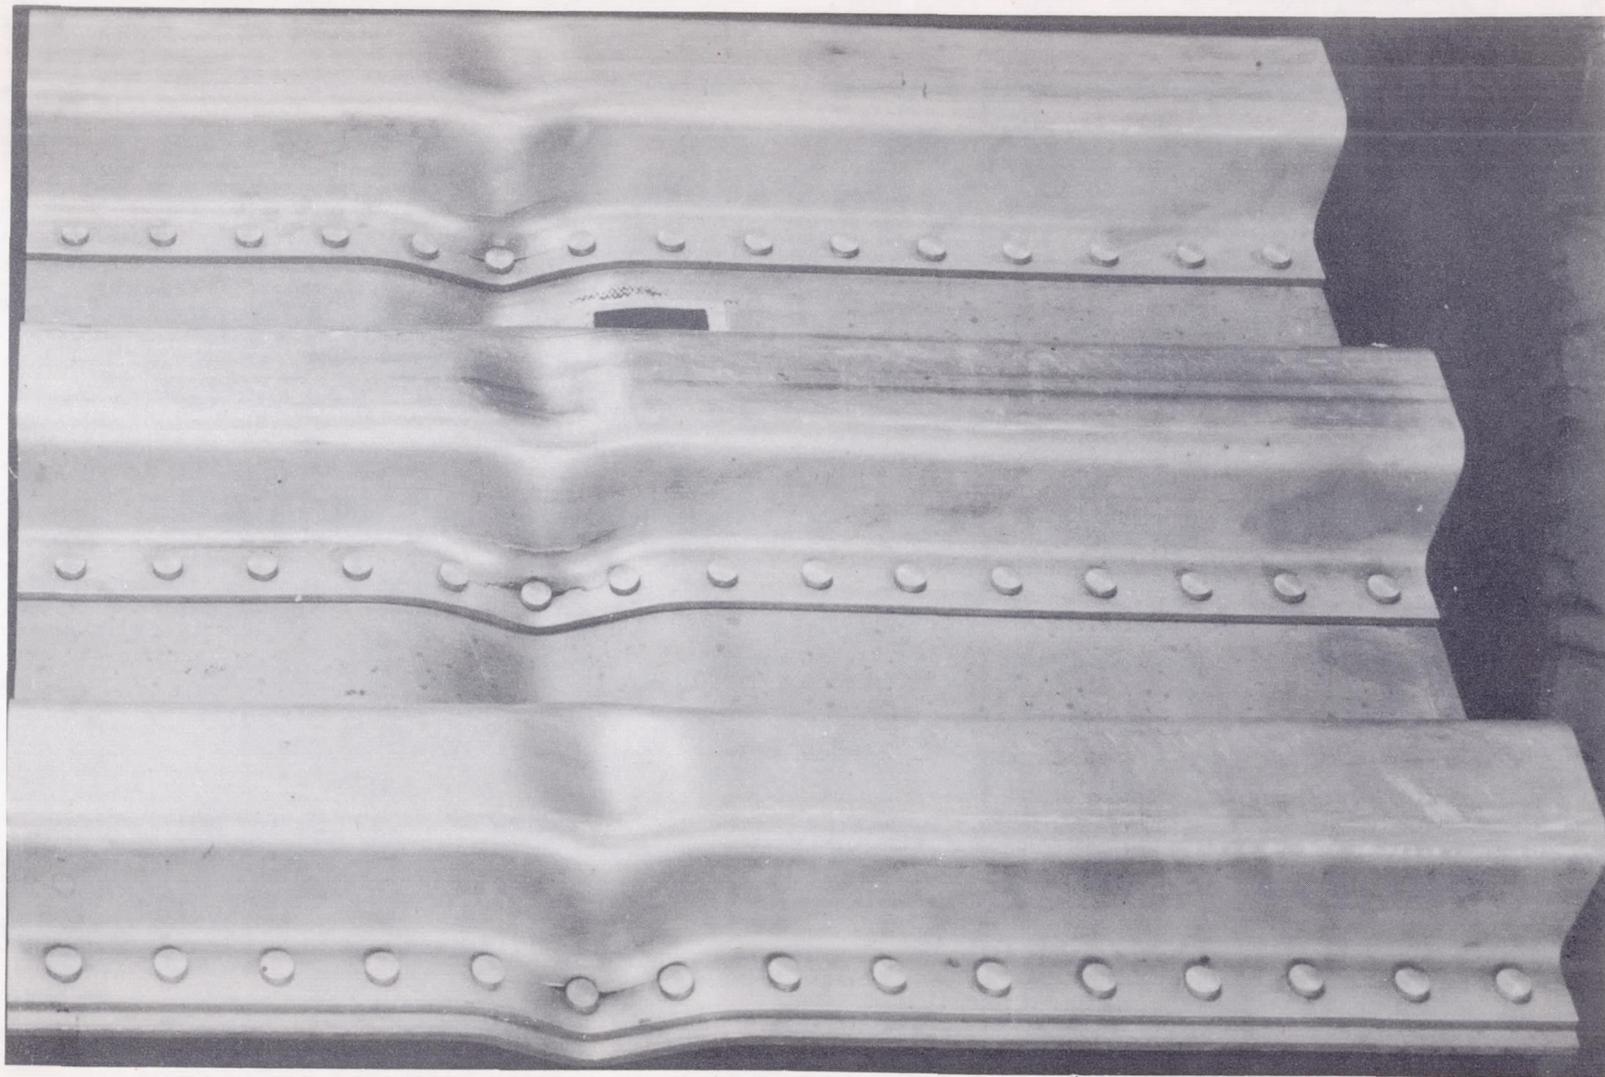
Specimen with 0.156-in. gage sheet after testing showing tension failure of the stiffener webs. These fractures occurred after the buckling failure.
